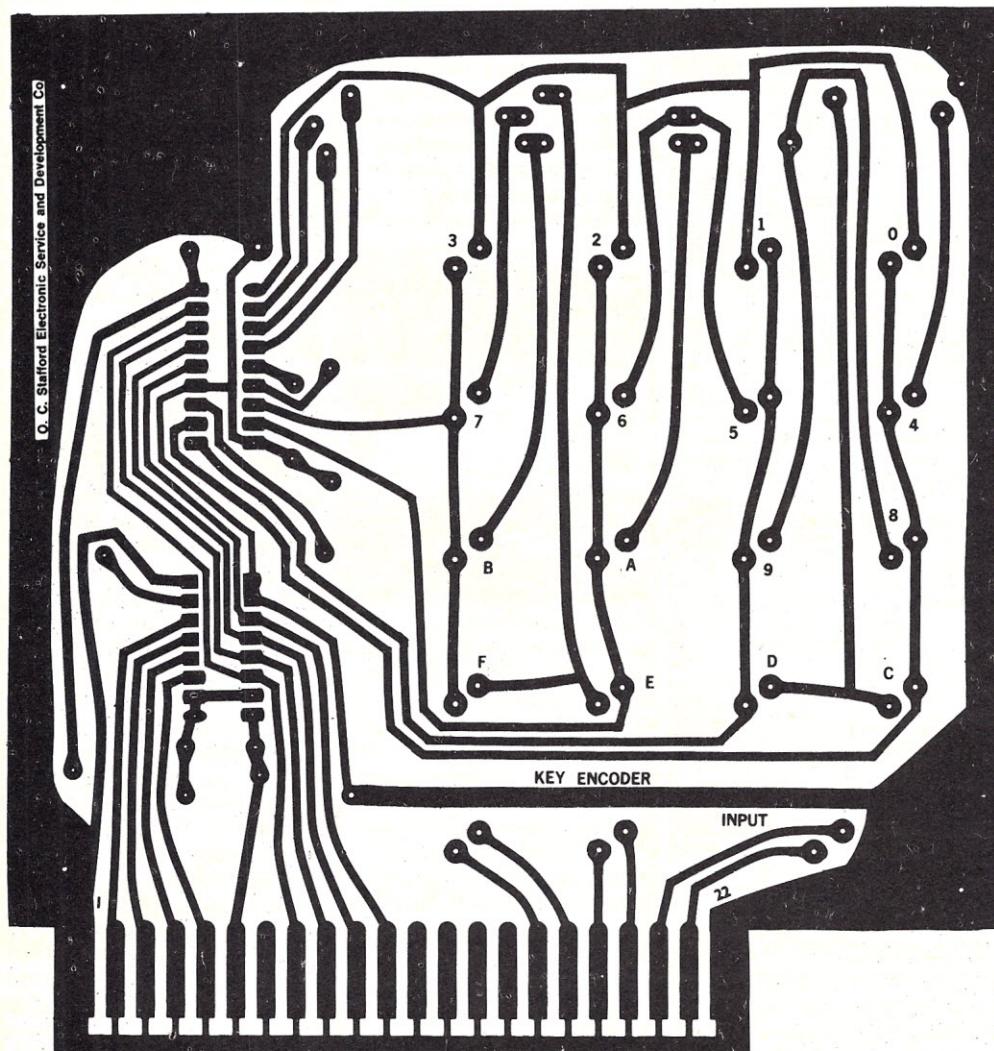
Full-size PC board pattern for the hexadecimal keyboard.
